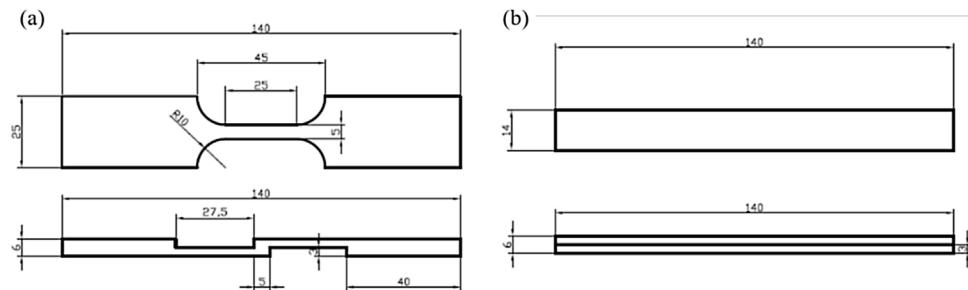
Dimensions of shear (a) and bending (b) specimen/mm.
